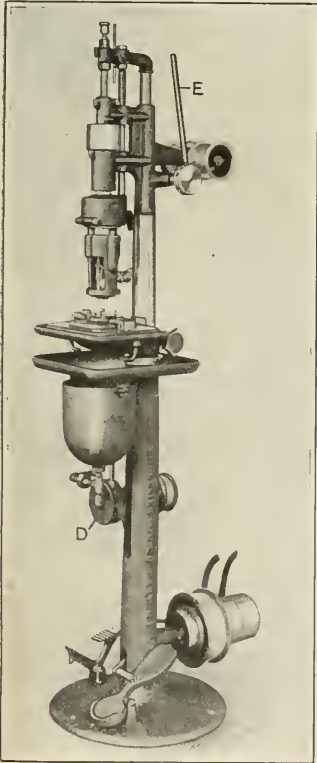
Multiple-spindle Drilling Machine used on Graduated Time Train Ring
